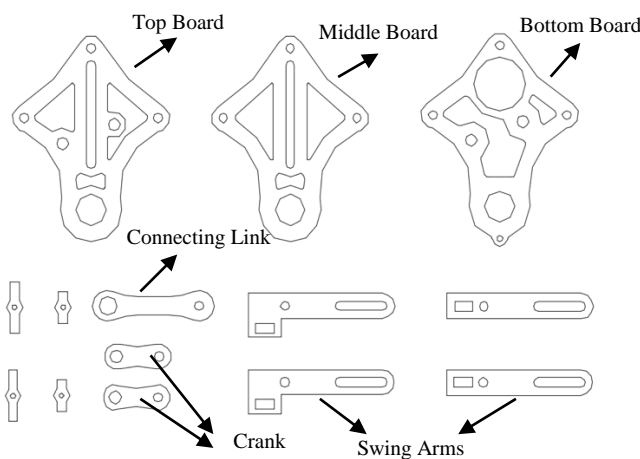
CAD drawing of the final design. Sketch was created using AutoCAD.
